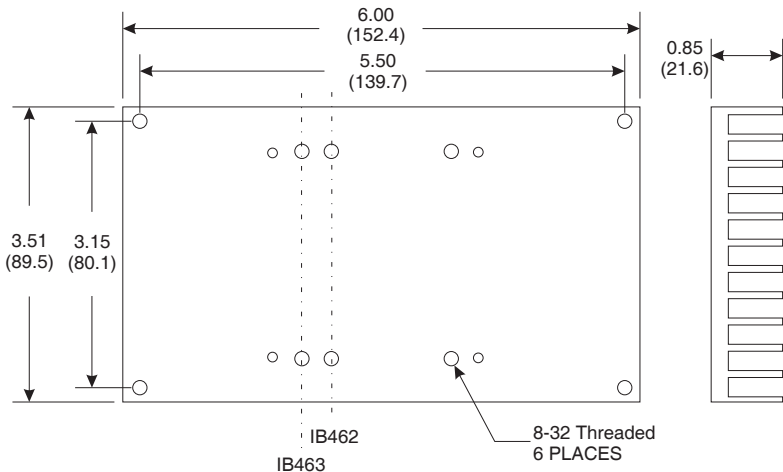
H-4X Heat Sink, Dimensions in Inches (mm)
